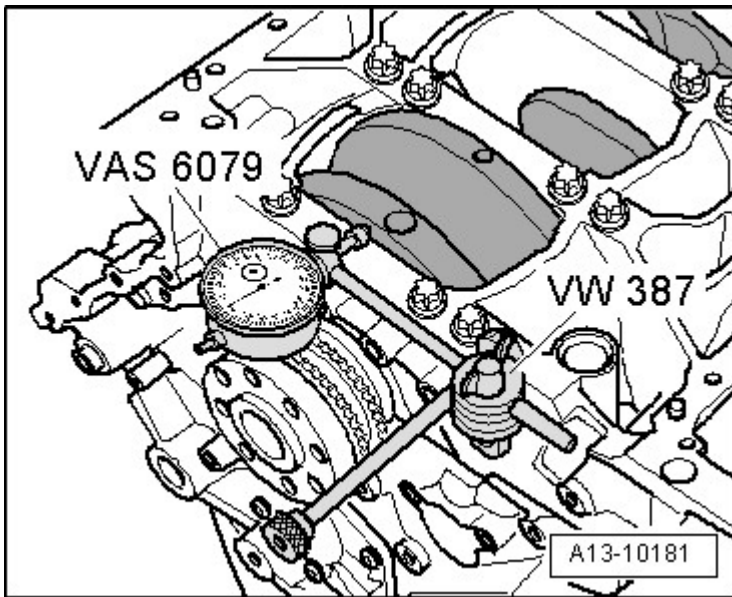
Identifying Special Tools - Dial Indicator VAS 6079 With Dial Gauge Holder VW 387
